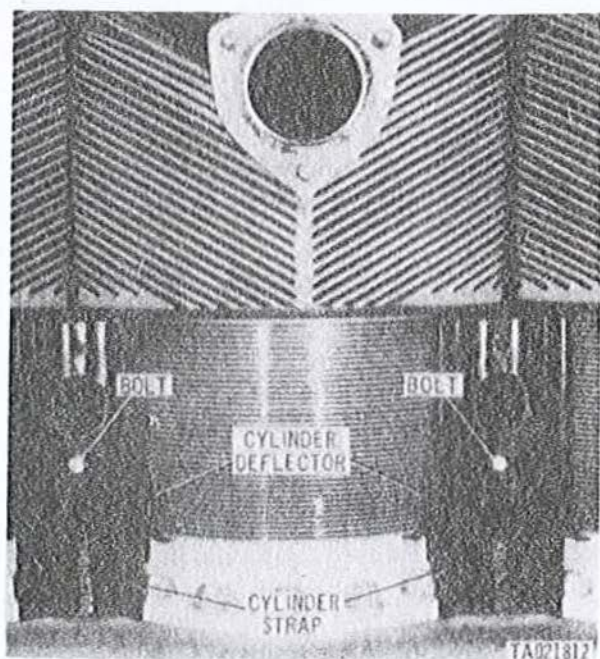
Removing or installing lower cylinder deflector straps and deflectors right side.
